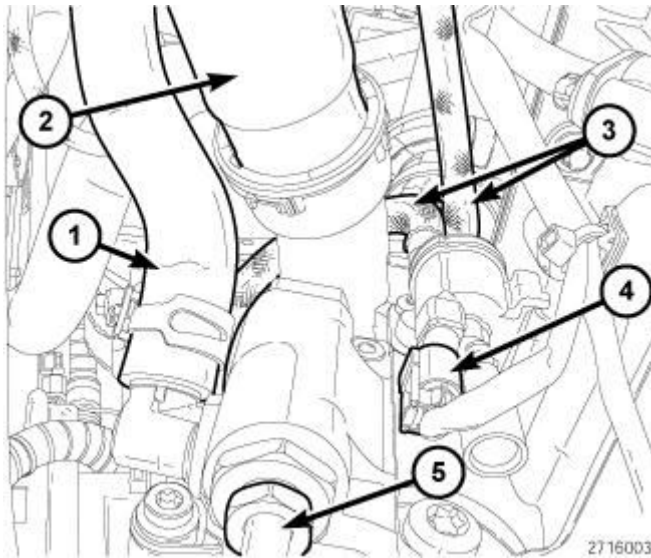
Vacuum Lines, Coolant Inlet Hose, Power Steering Pump Supply Hose & Vacuum Switch Connector
